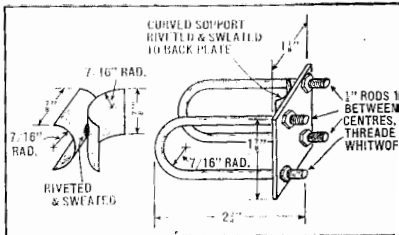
Details of the U-bolts, clamp plate and socket which lock the boom to mast. Dimensions will have to be altered if a Baker boom or mast is to be
